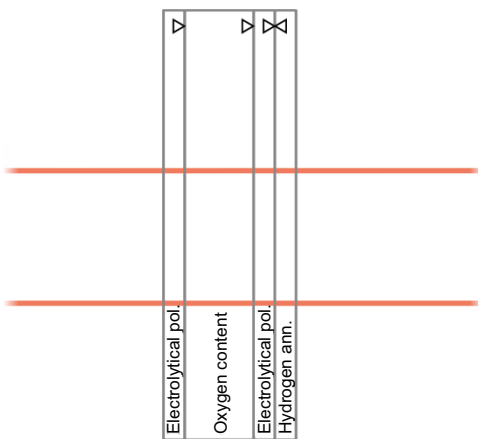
Samples extracted from the steady state part of the weld. The samples are located approximately 180° from the start of the weld. The red lines show the trace left by the shoulder.
